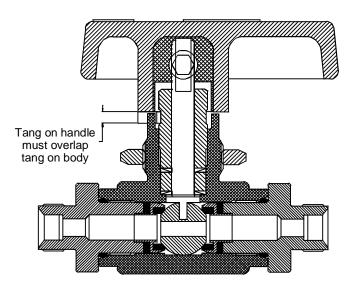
General Two-Way Ball Valve Cross-Sectional Assembly with Standard Teflon Packing
